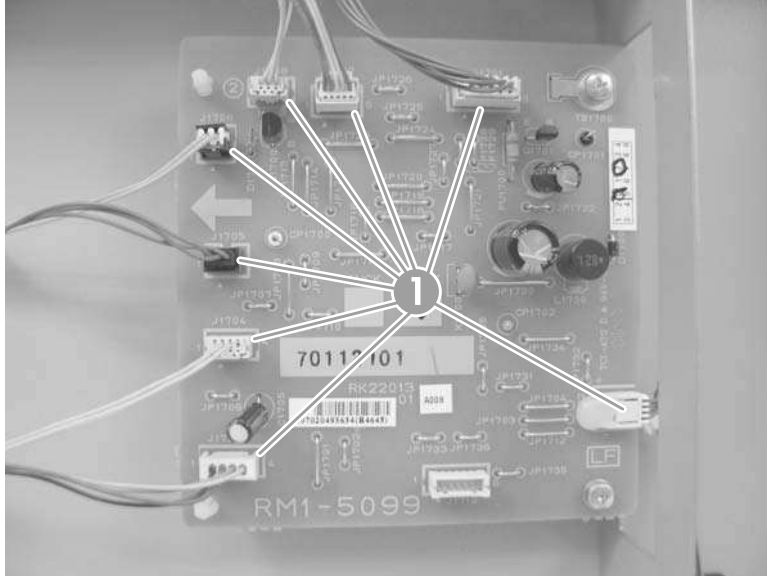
Remove the 1,500-sheet feeder motor (2 of 2)
